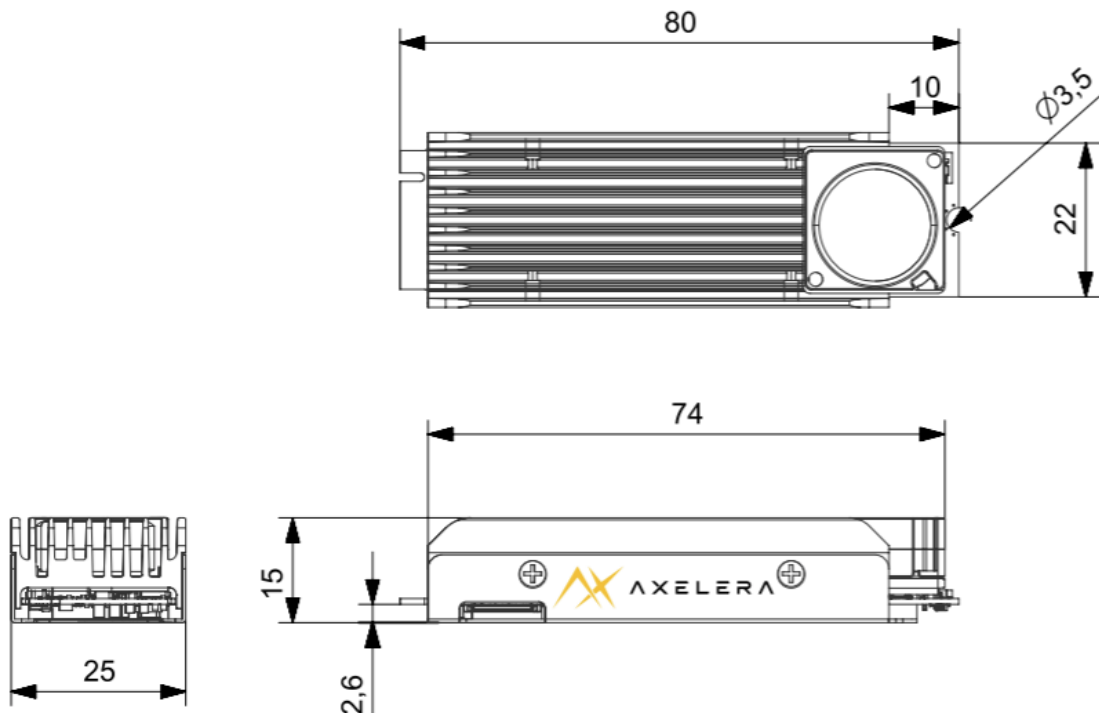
The fan-cooled heatsink for the Axelera Embedded 113m card
